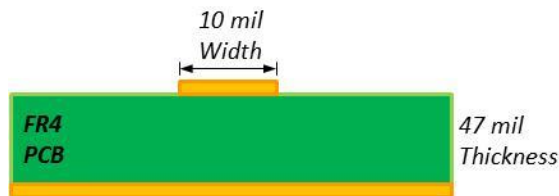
Cross-section of the land on the FR-4 PCB.
